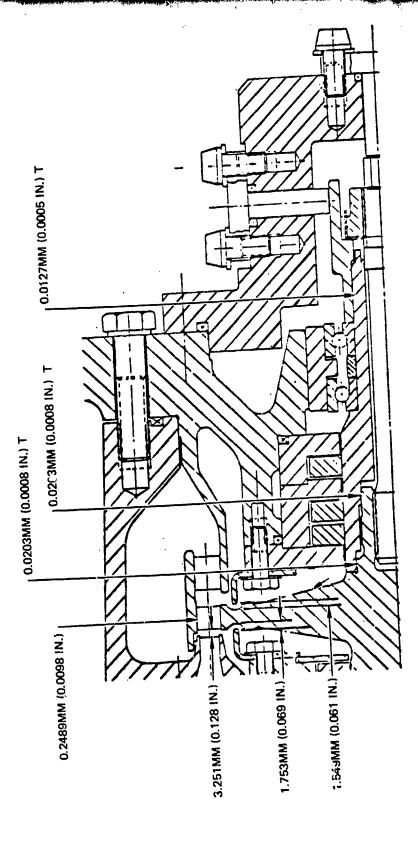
Mark 48-0 Turbopump S/N 03-0 Turbine Component Diametral Clearances and Fits
